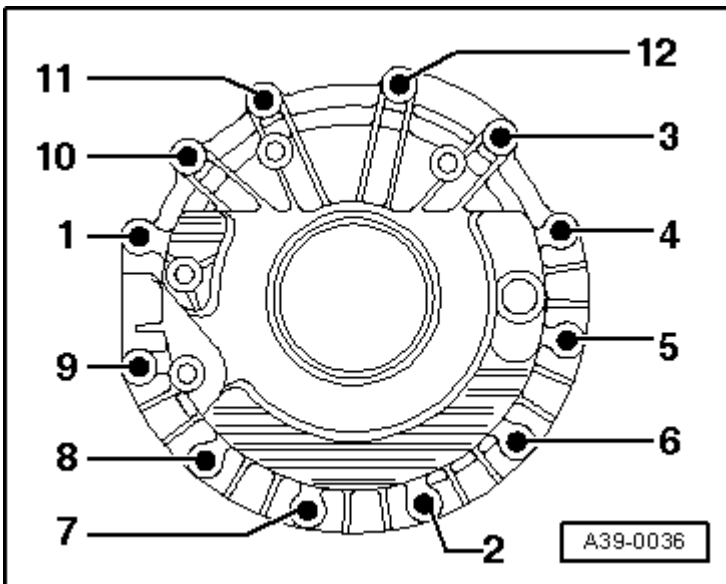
Installing Cover For Front Final Drive, Tightening Sequence
